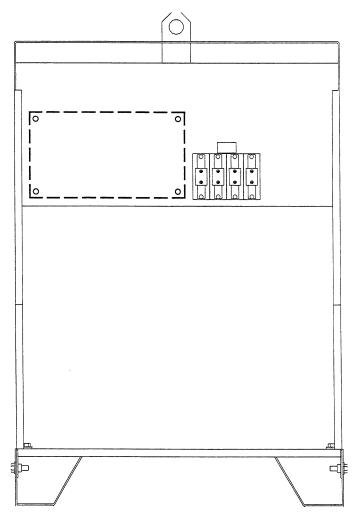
HT4001 Mounting Location of Start Circuit Subassembly
